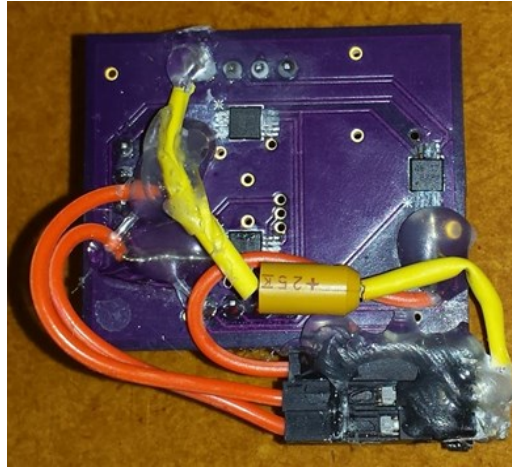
Motor driver PCB. Motor driver PCB with the fixes to h-bridge VCC and I<sup>2</sup>C.
